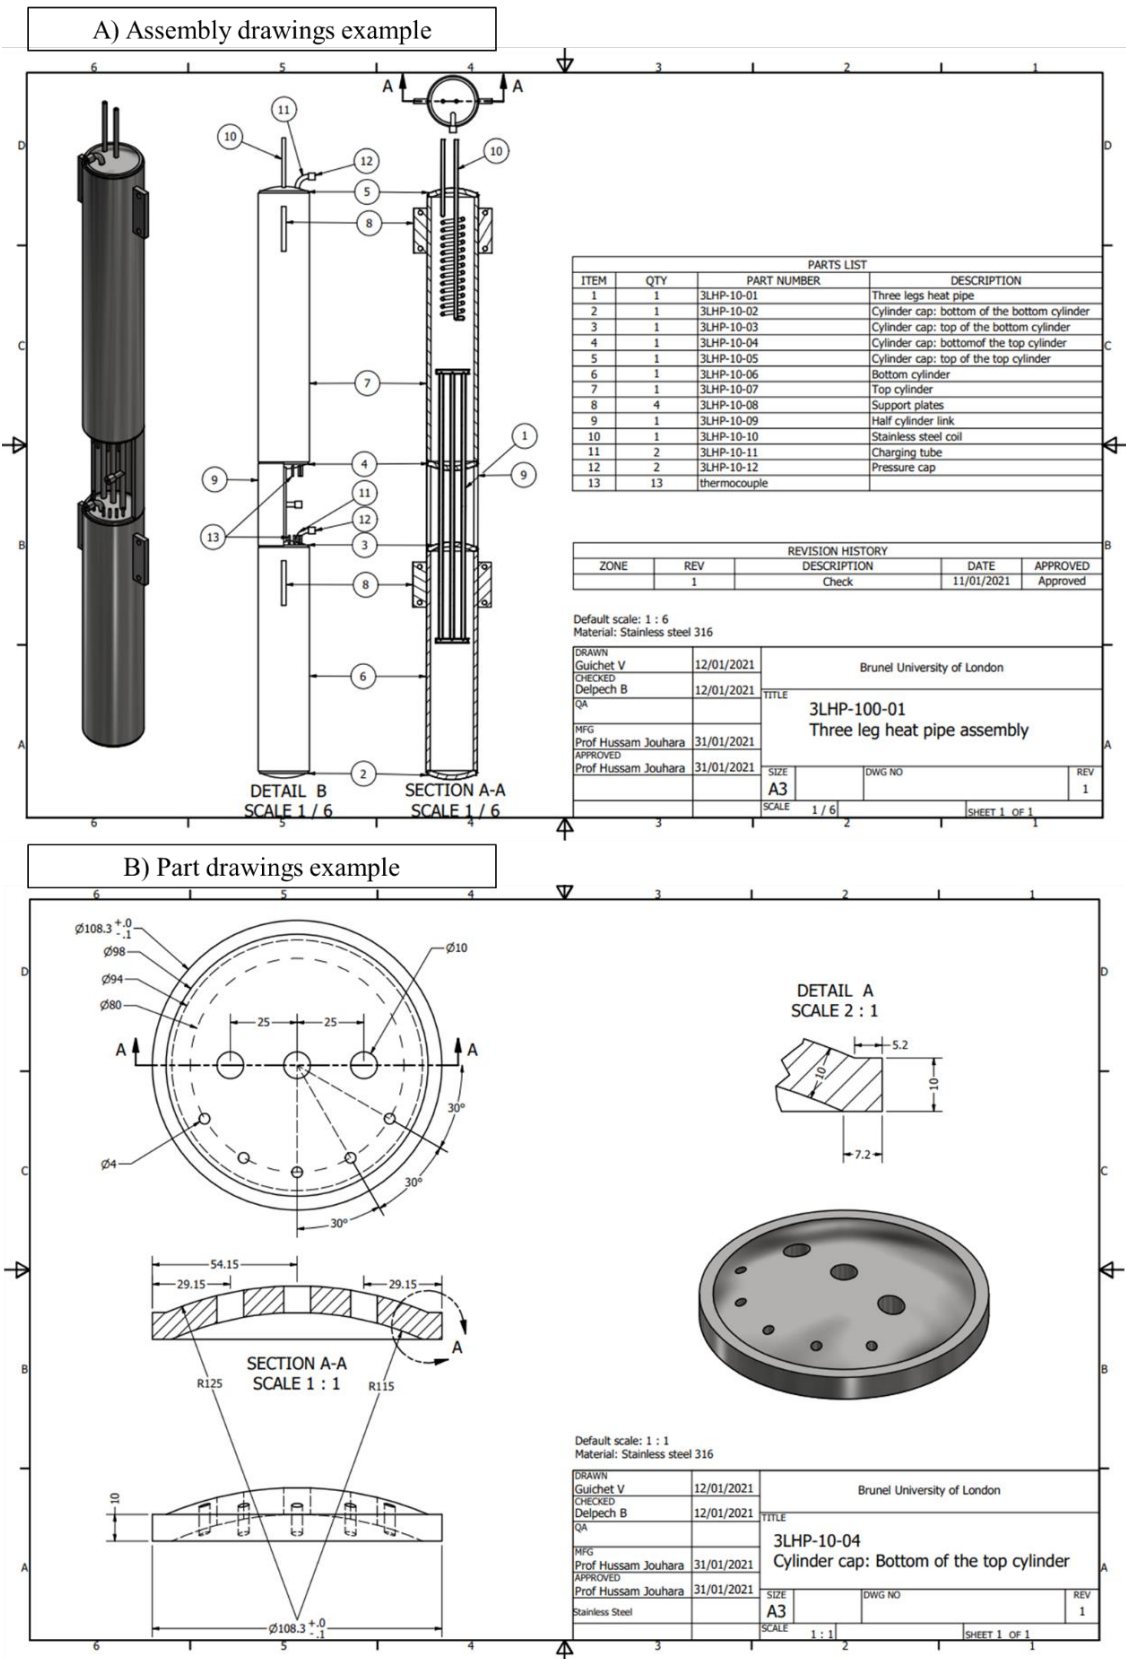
Manufacturing drawings of the three-leg heat pipe
